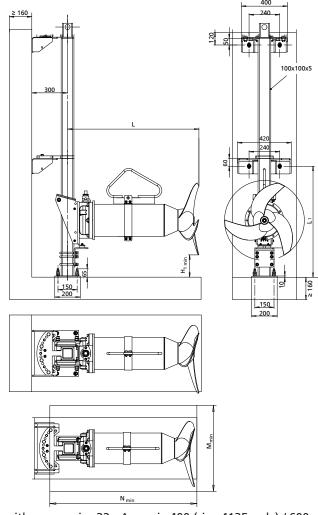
Installation with accessories 22 - Amamix 400 (size 4135 only) / 600
